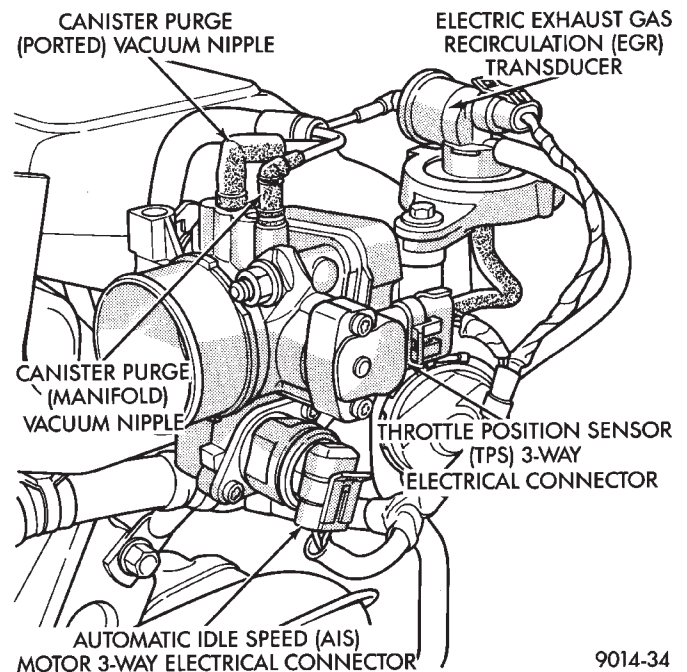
Electrical and Vacuum Connection to Throttle Body
